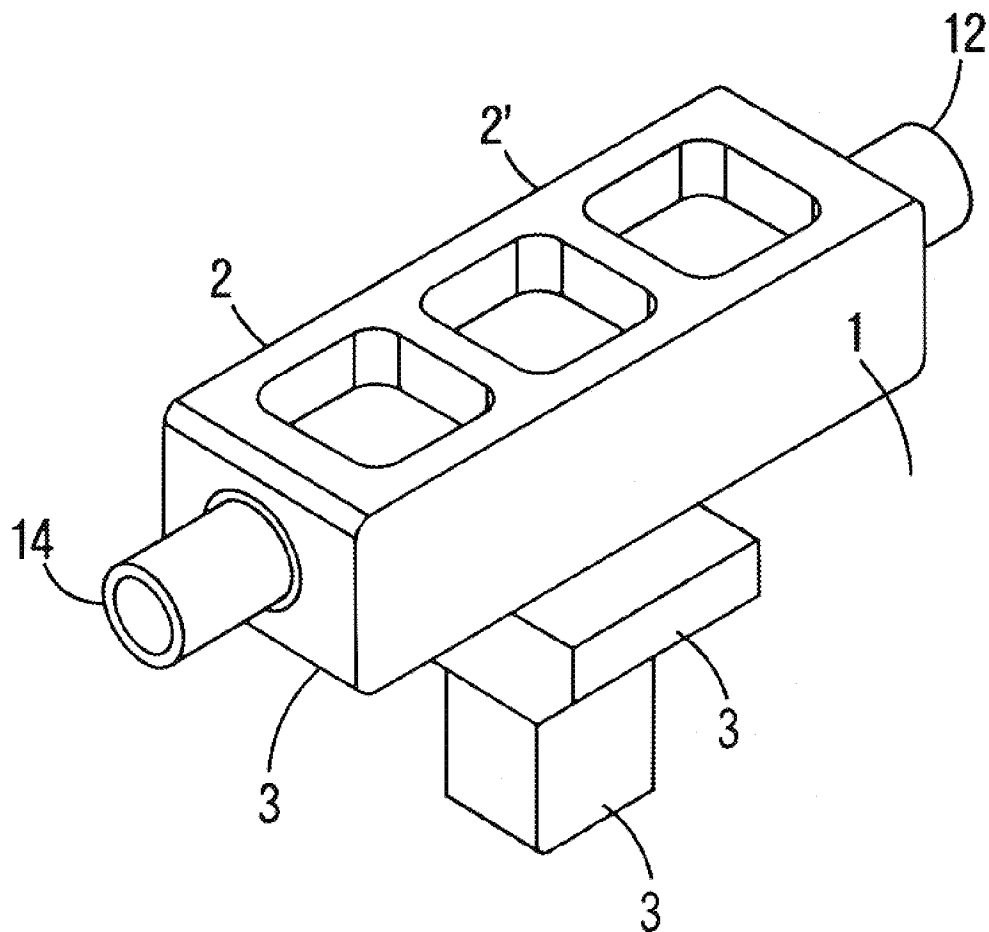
B — Perspective View of the SIP Multi-Pocket Embodiment
